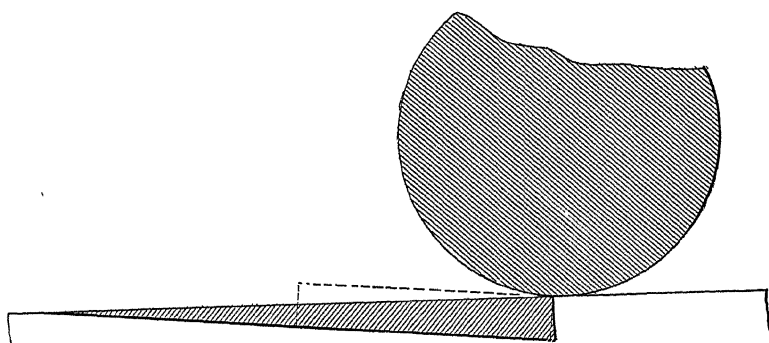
TAPER SECTIONS, WIDE OR NARROW, ROLLED BY TRANSVERSE MILL.
